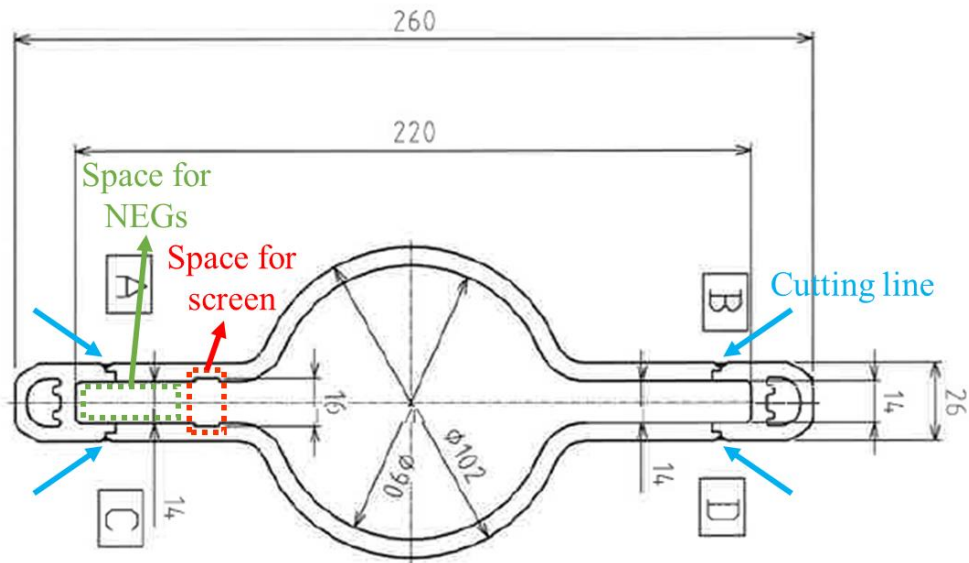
Cross-sectional dimensions of the beam pipe and position of the cutting line
